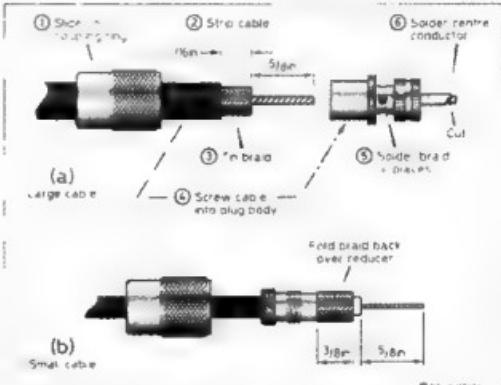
PL259 UHF Connector Assembly. Small cable needs a reducer
